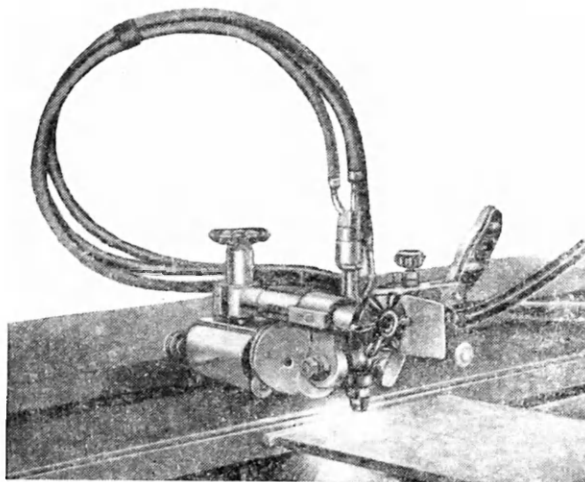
Type ПП-2 electric-driven tractor-mounted cutting machine
